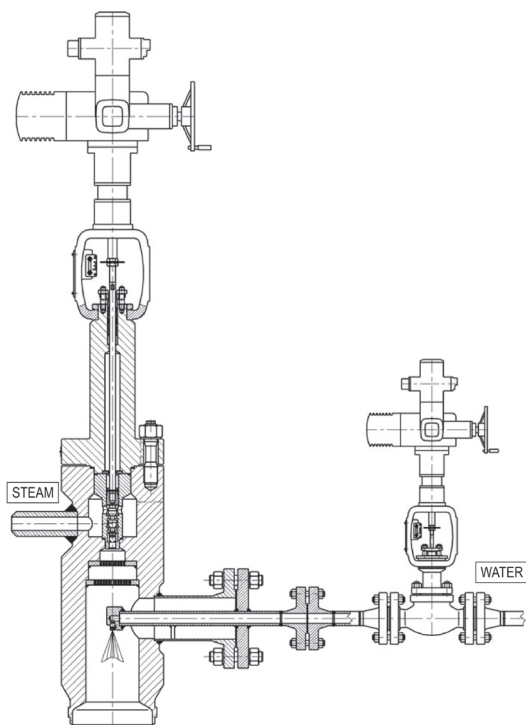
Steam reduction valve - DN25 /DN150 angle valve made of material X10CrMoVNb9-1 (1.4903). Multi-stage valve head and choking plates at the outflow for the purpose of eliminating choked flow and limiting the noise. The cooling chamber is an integral part of the valve. In the drawing there are also visible: wash pipe desuperheater, injection valve of the anti-cavitation structure.
